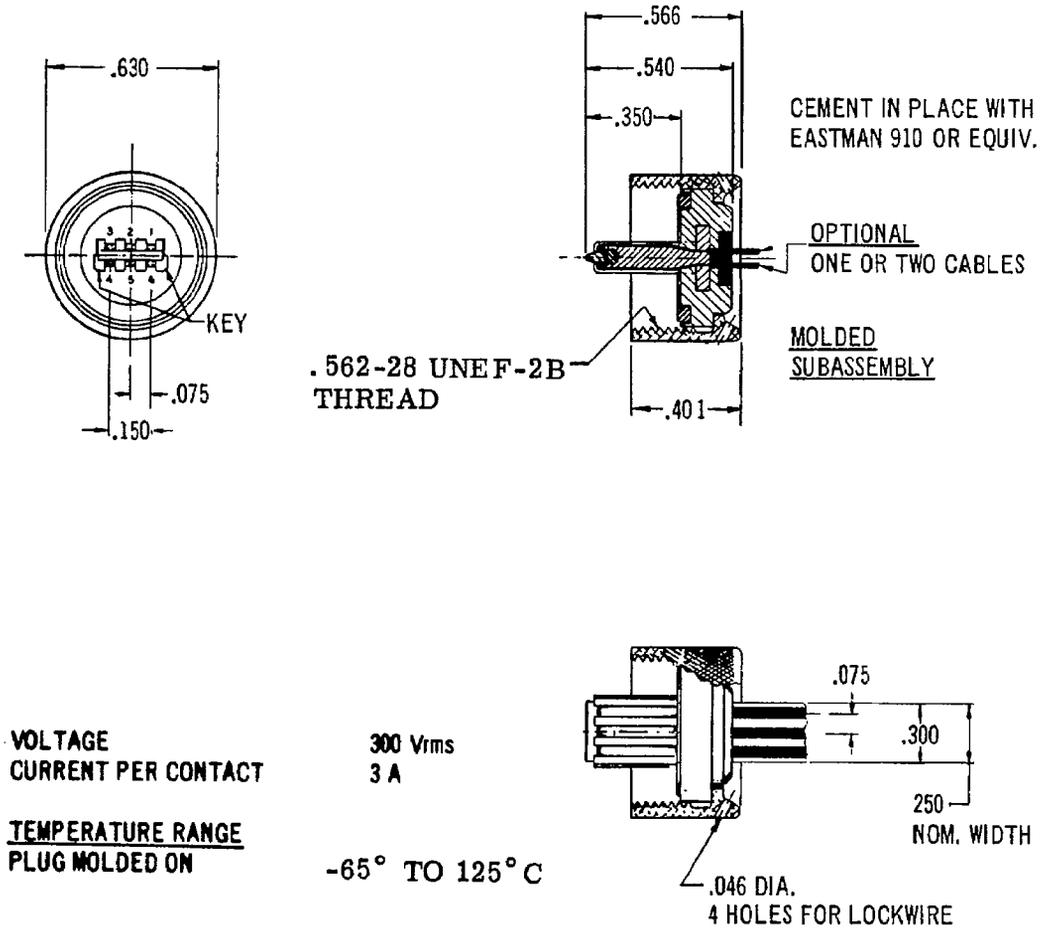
MIL-C-55544/9 Molded-on cylindrical plug assembly, .25-inch wide cable.
